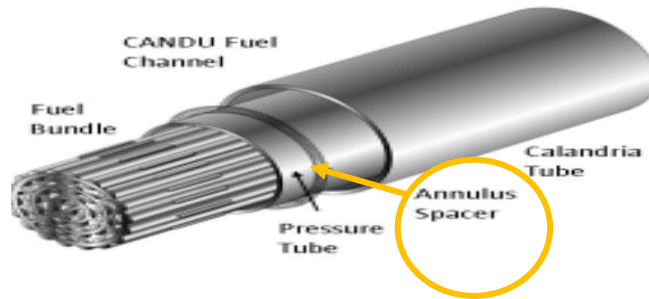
CANDU fuel channel with Inconel X-750 spacer coil highlighted [11].
